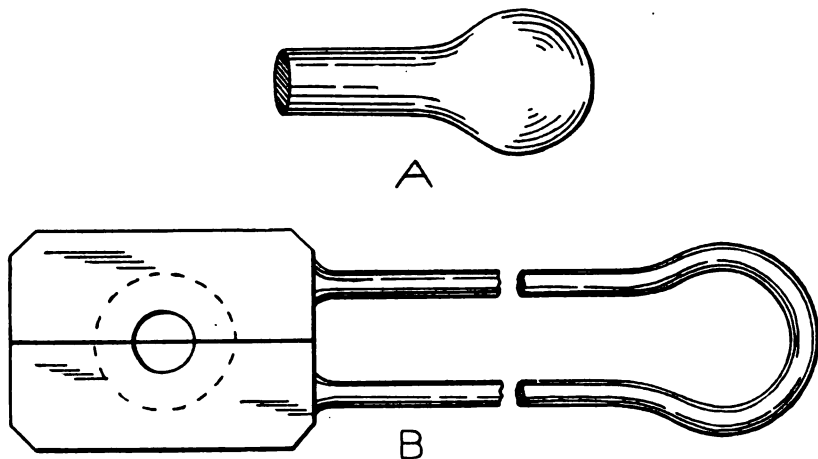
ASH PAN SHAKER FORGING. TOOL FOR FORMING BALL.
